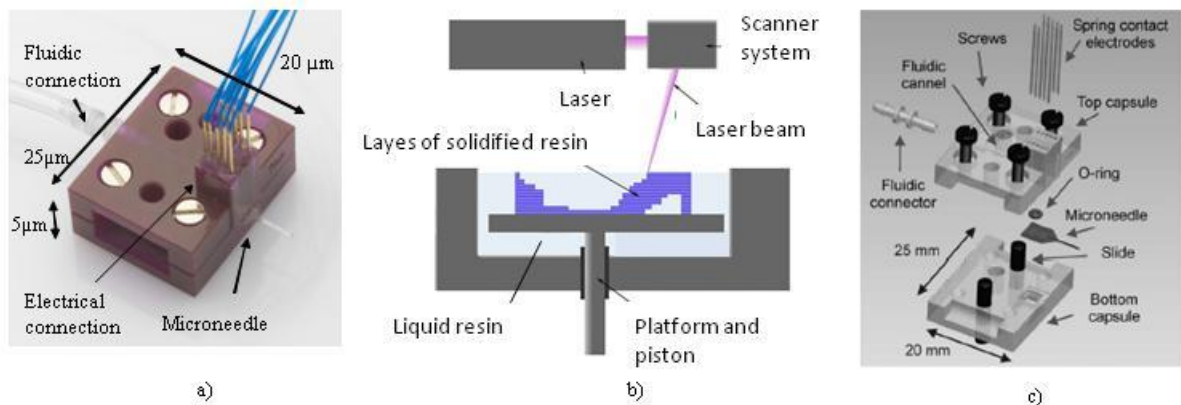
a) A picture of an encapsulated microprobe, b) schematic picture of the stereolithography technique and c) package drawing scheme
